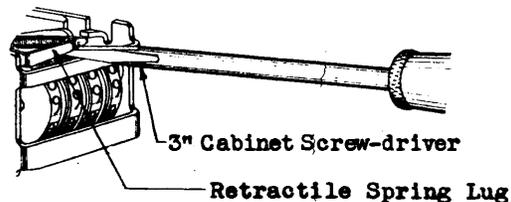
Method of Adjusting Retractable Spring Lug Upward
